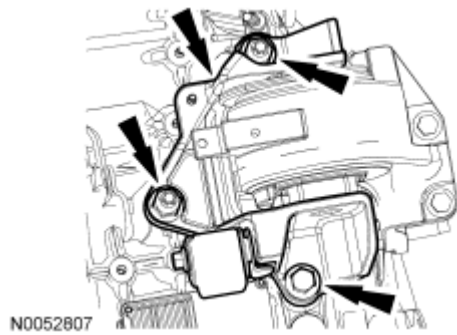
Locating Transaxle Support Insulator Bracket Nuts & Bolt
